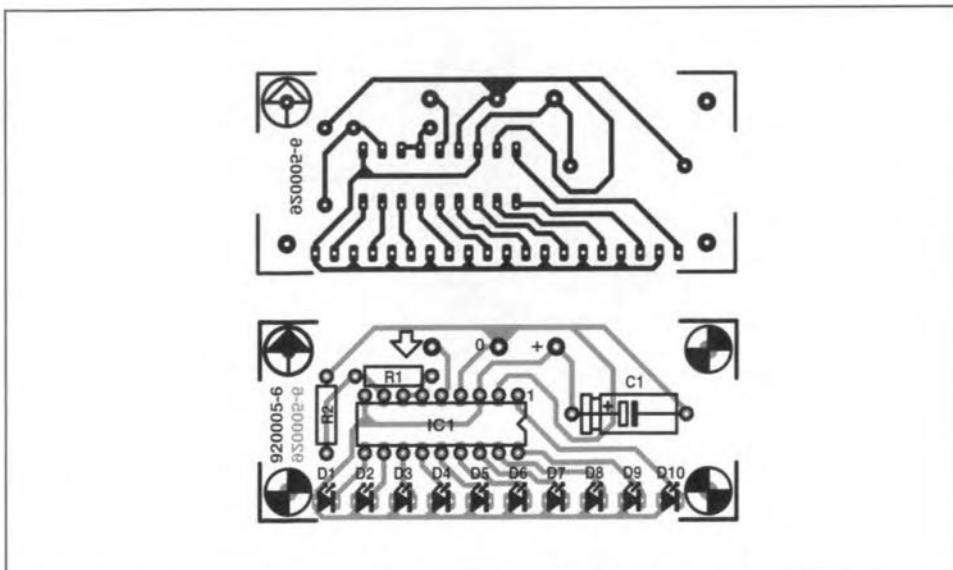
Track layout (mirror image) and component overlay of the S-meter PCB.
